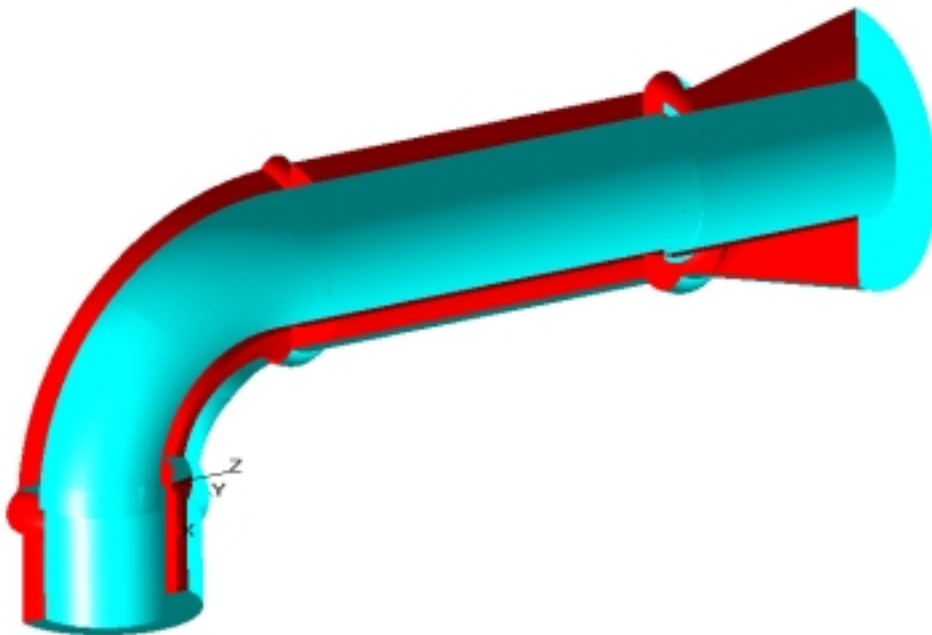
Model of piping taken from the 'C' Type switch showing the crack in the flange weld.
